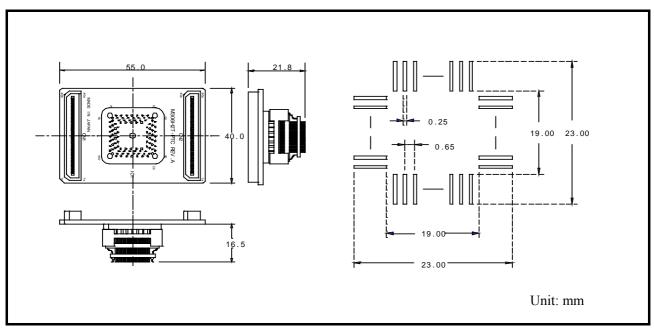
External dimensions of the converter board M306H2T-PTC and a sample foot pattern for the NQPACK116SB
